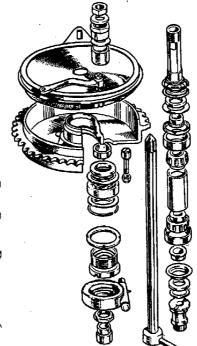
Arrangement of Rear Brake Drum 1955-56 Models.
